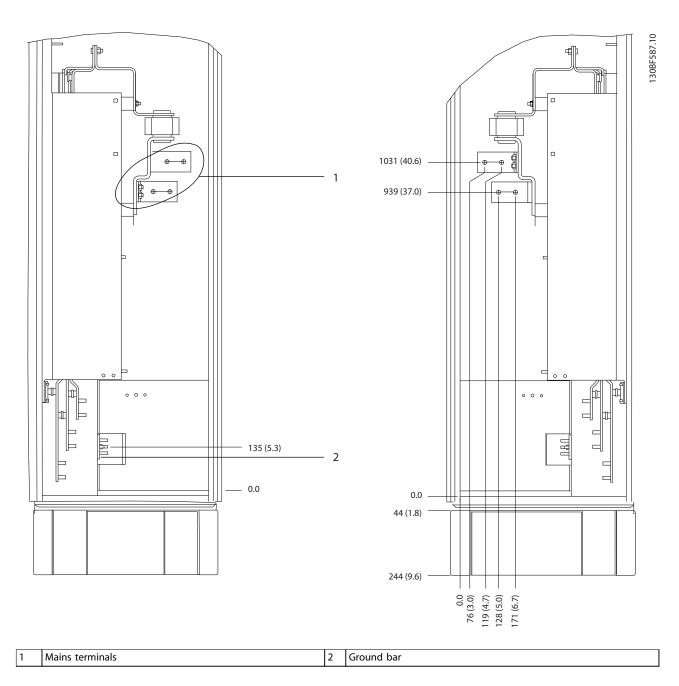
Terminal Dimensions for F3-F4 Options Cabinet, Side View
